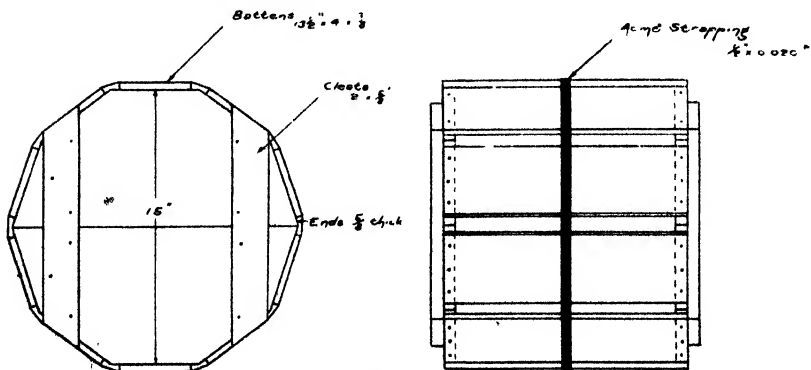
CLEATED CRATE TO HOLD ONE 80 LB. CHEESE.
